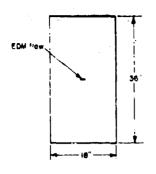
SHEET FRACTURE TOUGH-NESS SPECIMEN
